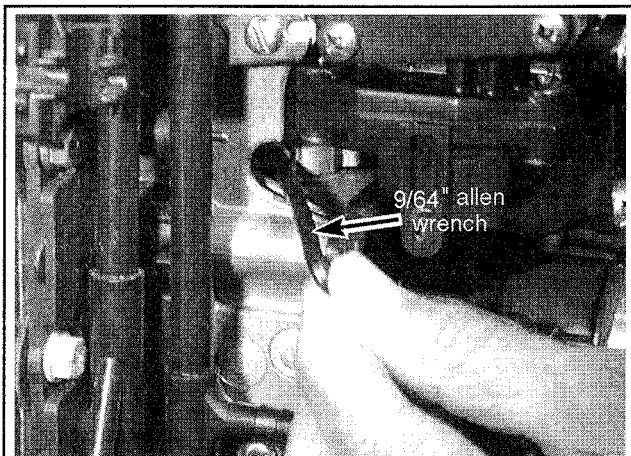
Use a 9/64 in. hex key or driver to loosen/tighten the throttle shaft connector screws
